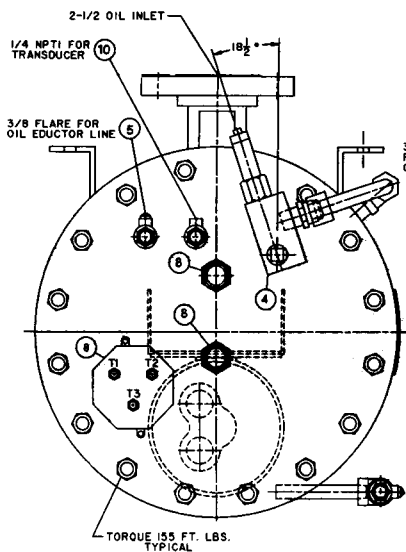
SCREWS AND COVER ASSEMBLY
